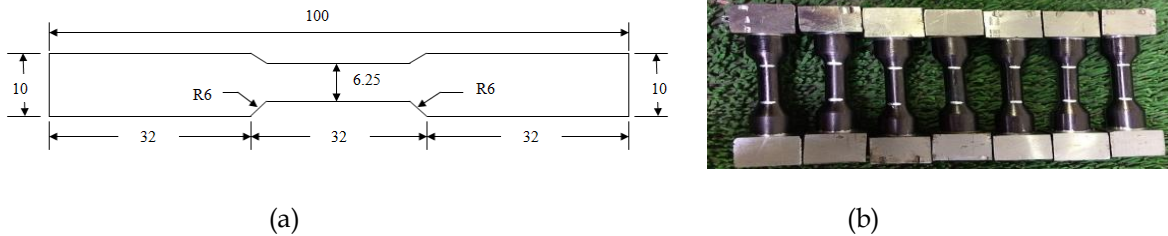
For different testing the arrangement of cutting specimens (All dimensions are in mm)
